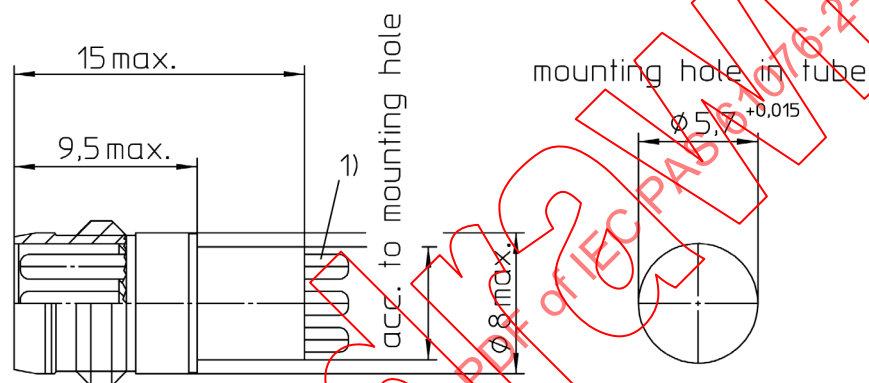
Tube insert, male contacts dip solder mounting, long version
